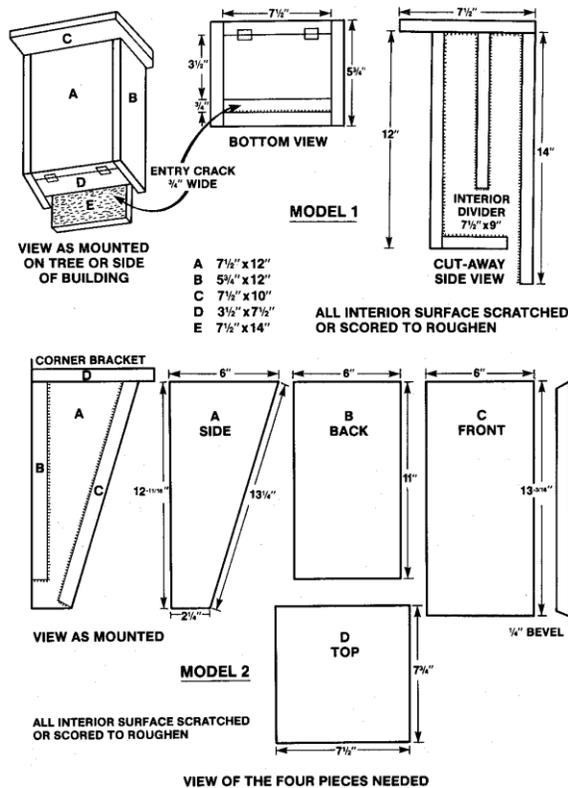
Bat house design. Place completed bat house 10-15 ft above ground in sites protected from exposure to afternoon sun.
